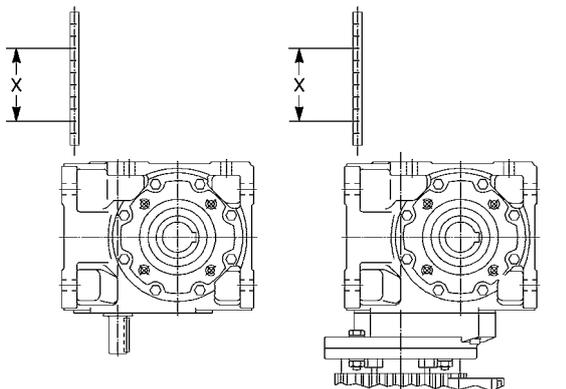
Position the gear reducer or gearmotor, mounting position B7 for the measurement of oil level (quantity).
